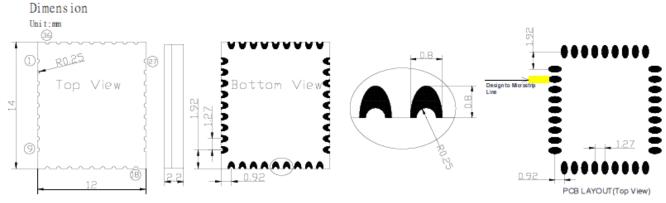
Pin Configuration for the BTM160 and PCB Layout
